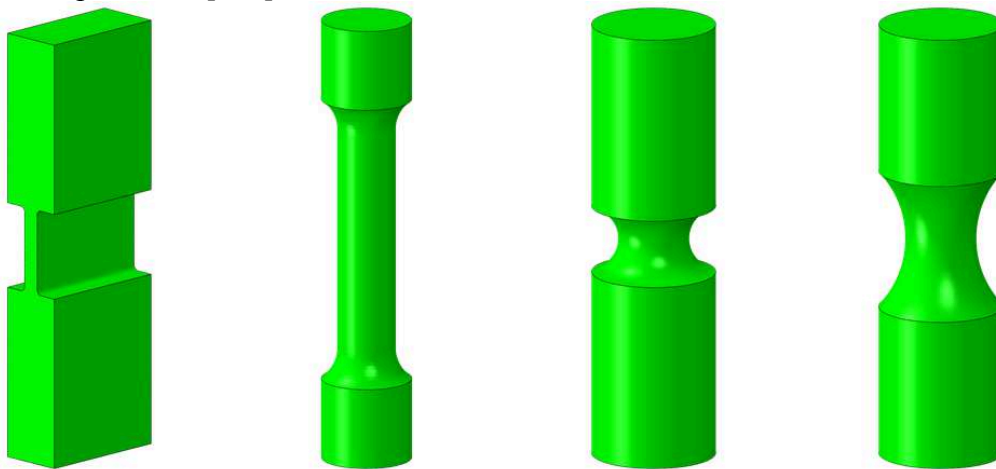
From left, geometry of flat grooved specimen, smooth specimen and notched specimens
